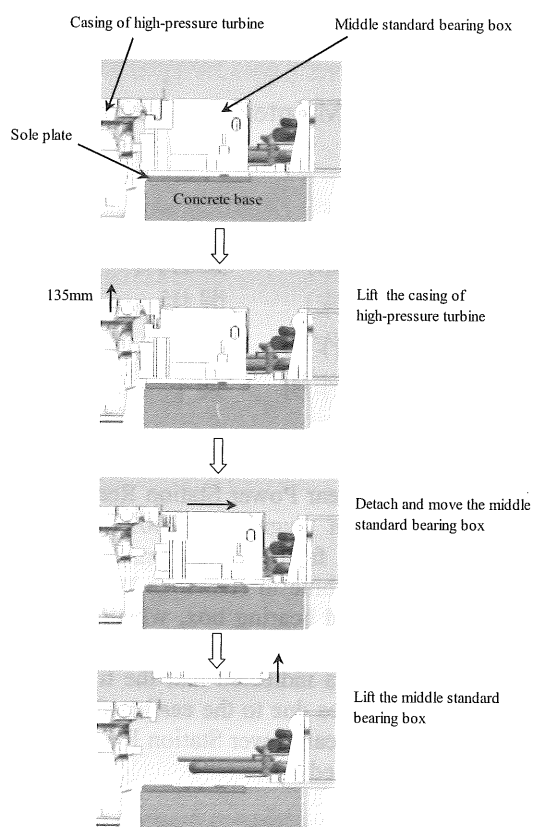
The Process of detaching the middle standard bearing box from the turbine base
